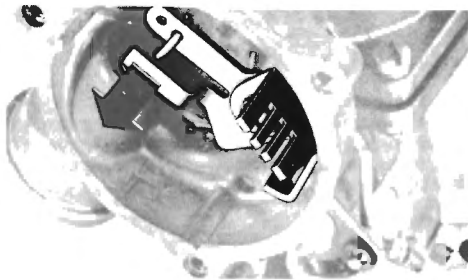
Vacuum piston position for choke plate pull-down setting -FoMoCo
